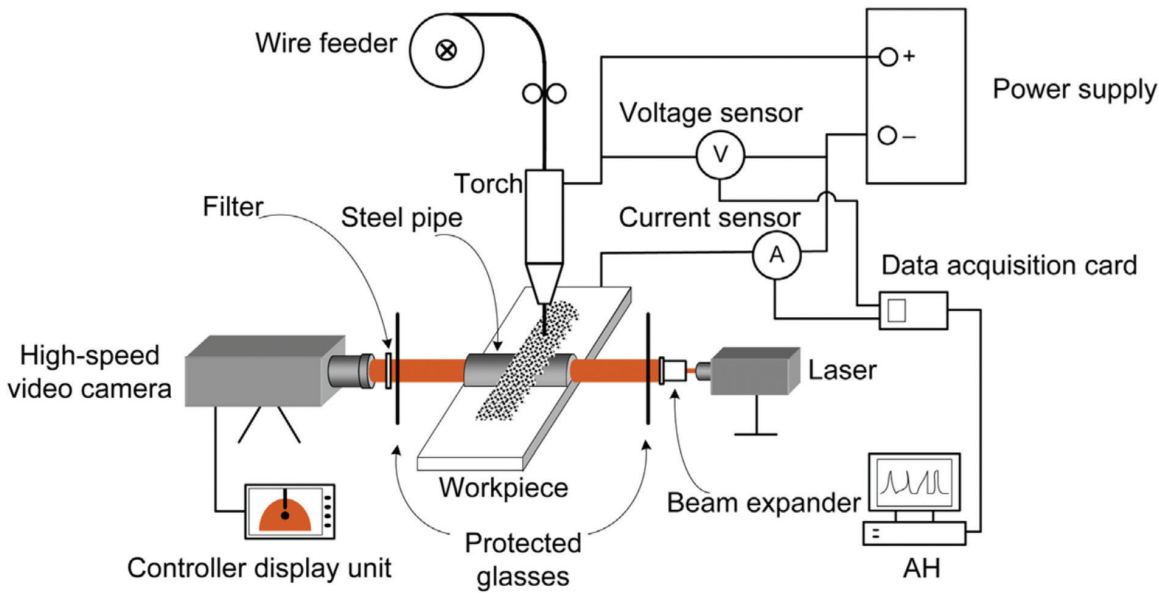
Experimental setup for laser backlighting to capture metal transfer in SAW (Ref. 54).
